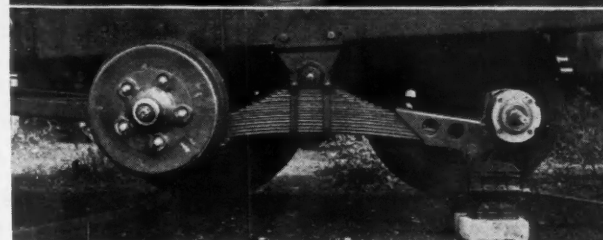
The Twin-Flex attachment designed for Chevrolet trucks is furnished with or without brakes and may be employed as a dead or driven unit. The unit is attached to the rear of the truck axle and comprises a frame extension; two torque arms, swiveled for universal action on knuckles on both axes; a spring pivot rod, two steel spring radius rods and a roller type drive chain, which fits sprockets in the wheel hubs. Two semi-elliptic springs pivoted on a cross rod support the axles. Front ends of springs are shackled and rear ends ride on hard rollers
